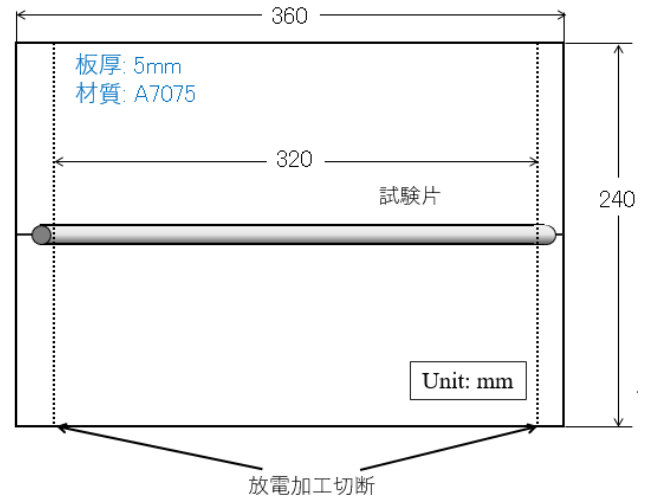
The electro discharge machining (EDM) cutting of the test piece.
